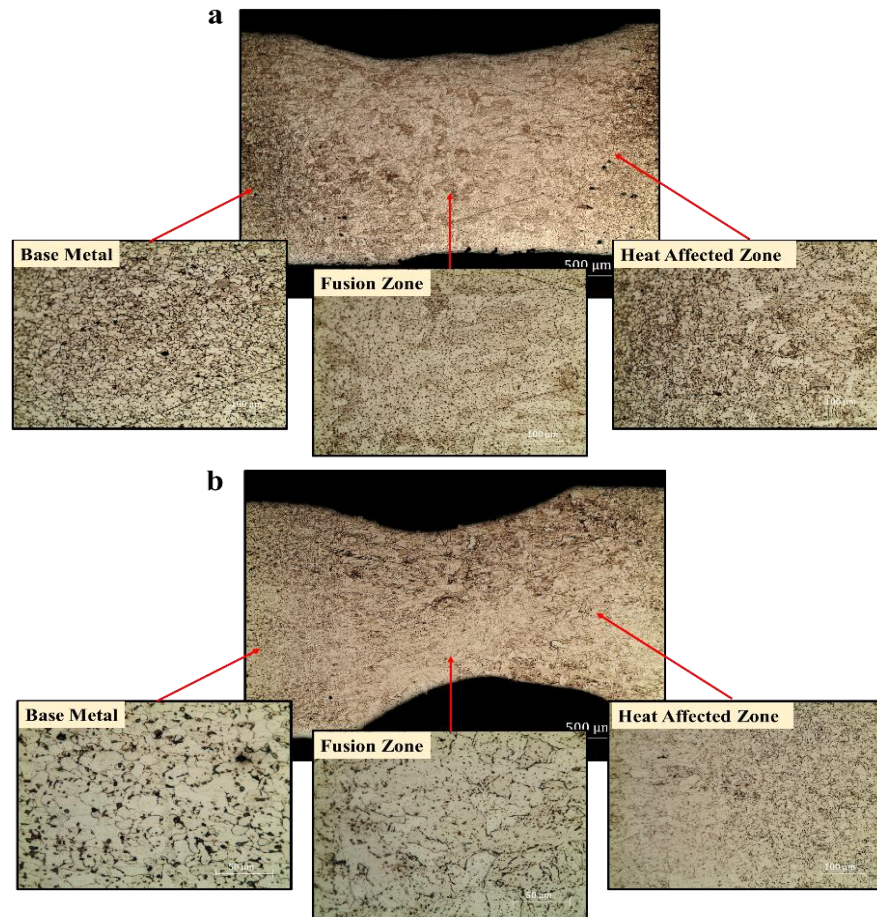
Optical microscope images of (a) steel sample welded with laser at 15 mm focal length and (b) steel sample welded with 20 mm focal length.
